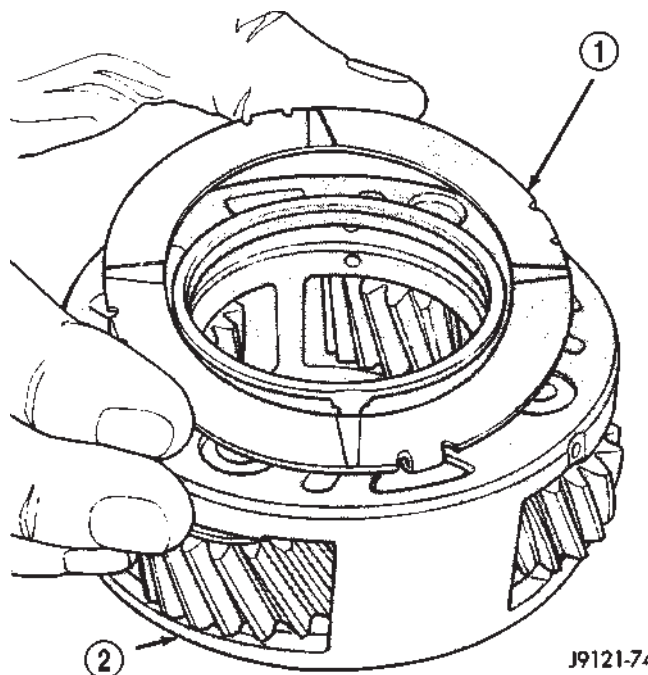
Installing Thrust Washer On Front Planetary Gear
